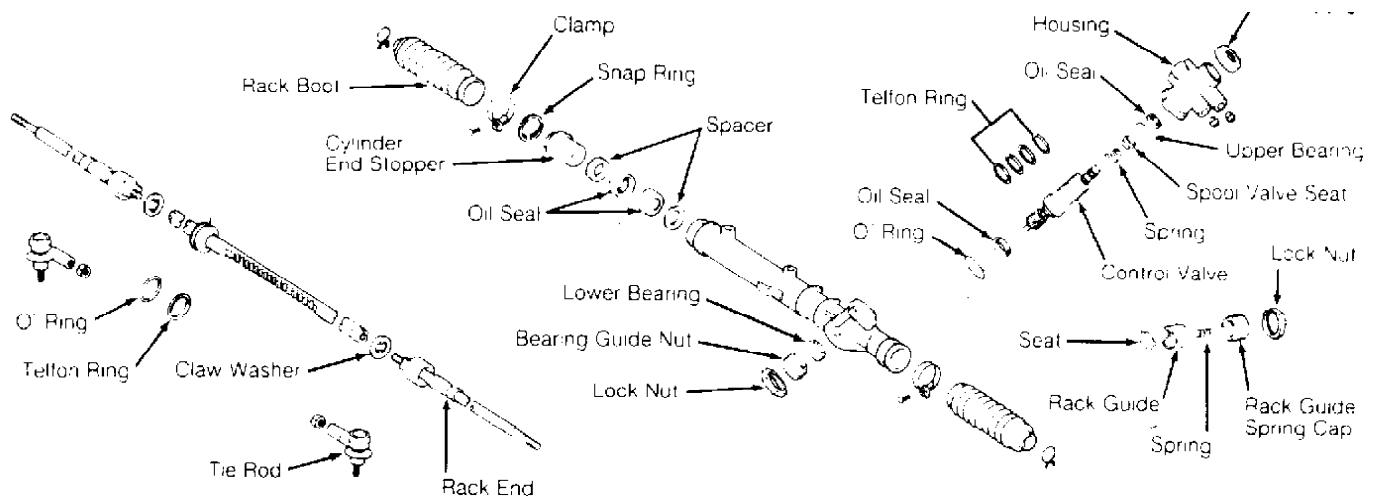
Exploded View of Celica Power Rack & Pinion Steering Gear
